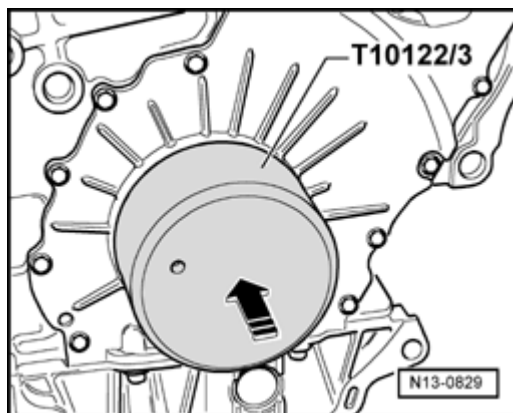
Driving Seal Into Sealing Flange Until Stop Using Thrust Piece T10122/3
